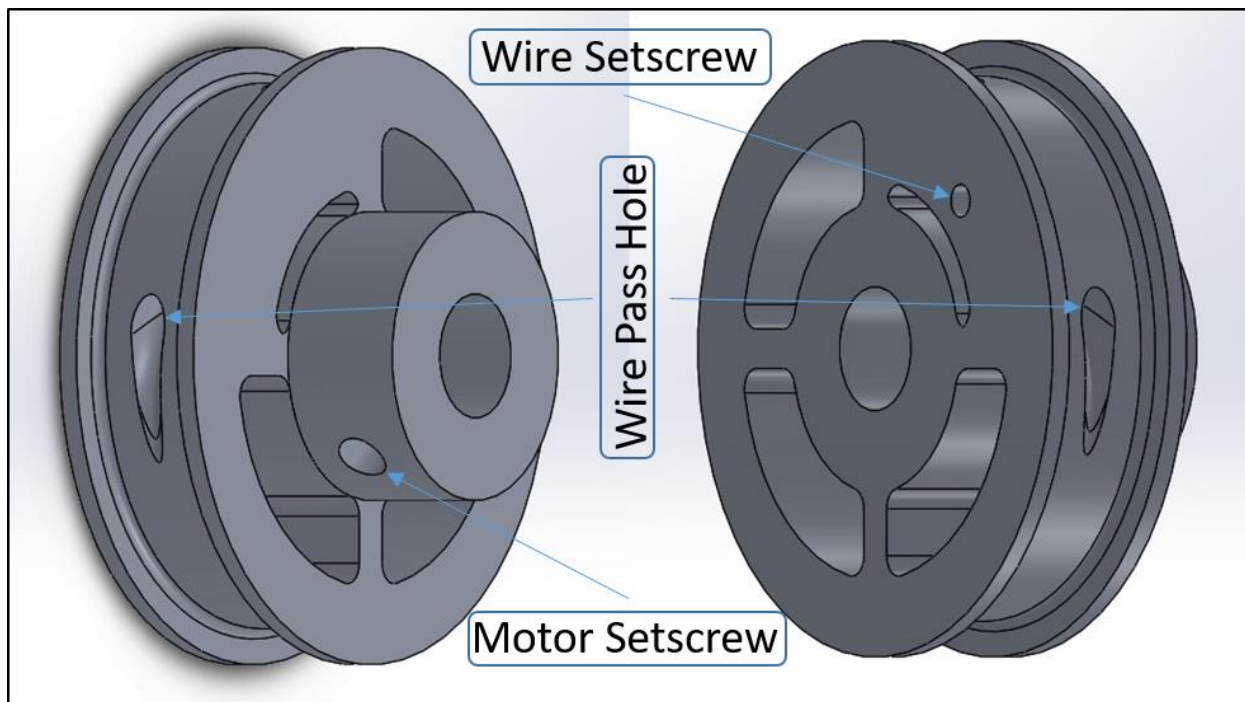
The Motor Pulley. A set screw on the center shaft attaches to the motor shaft. The hole in the cable trough allows the cable to pass through be crimped by the set screw in the wall.
